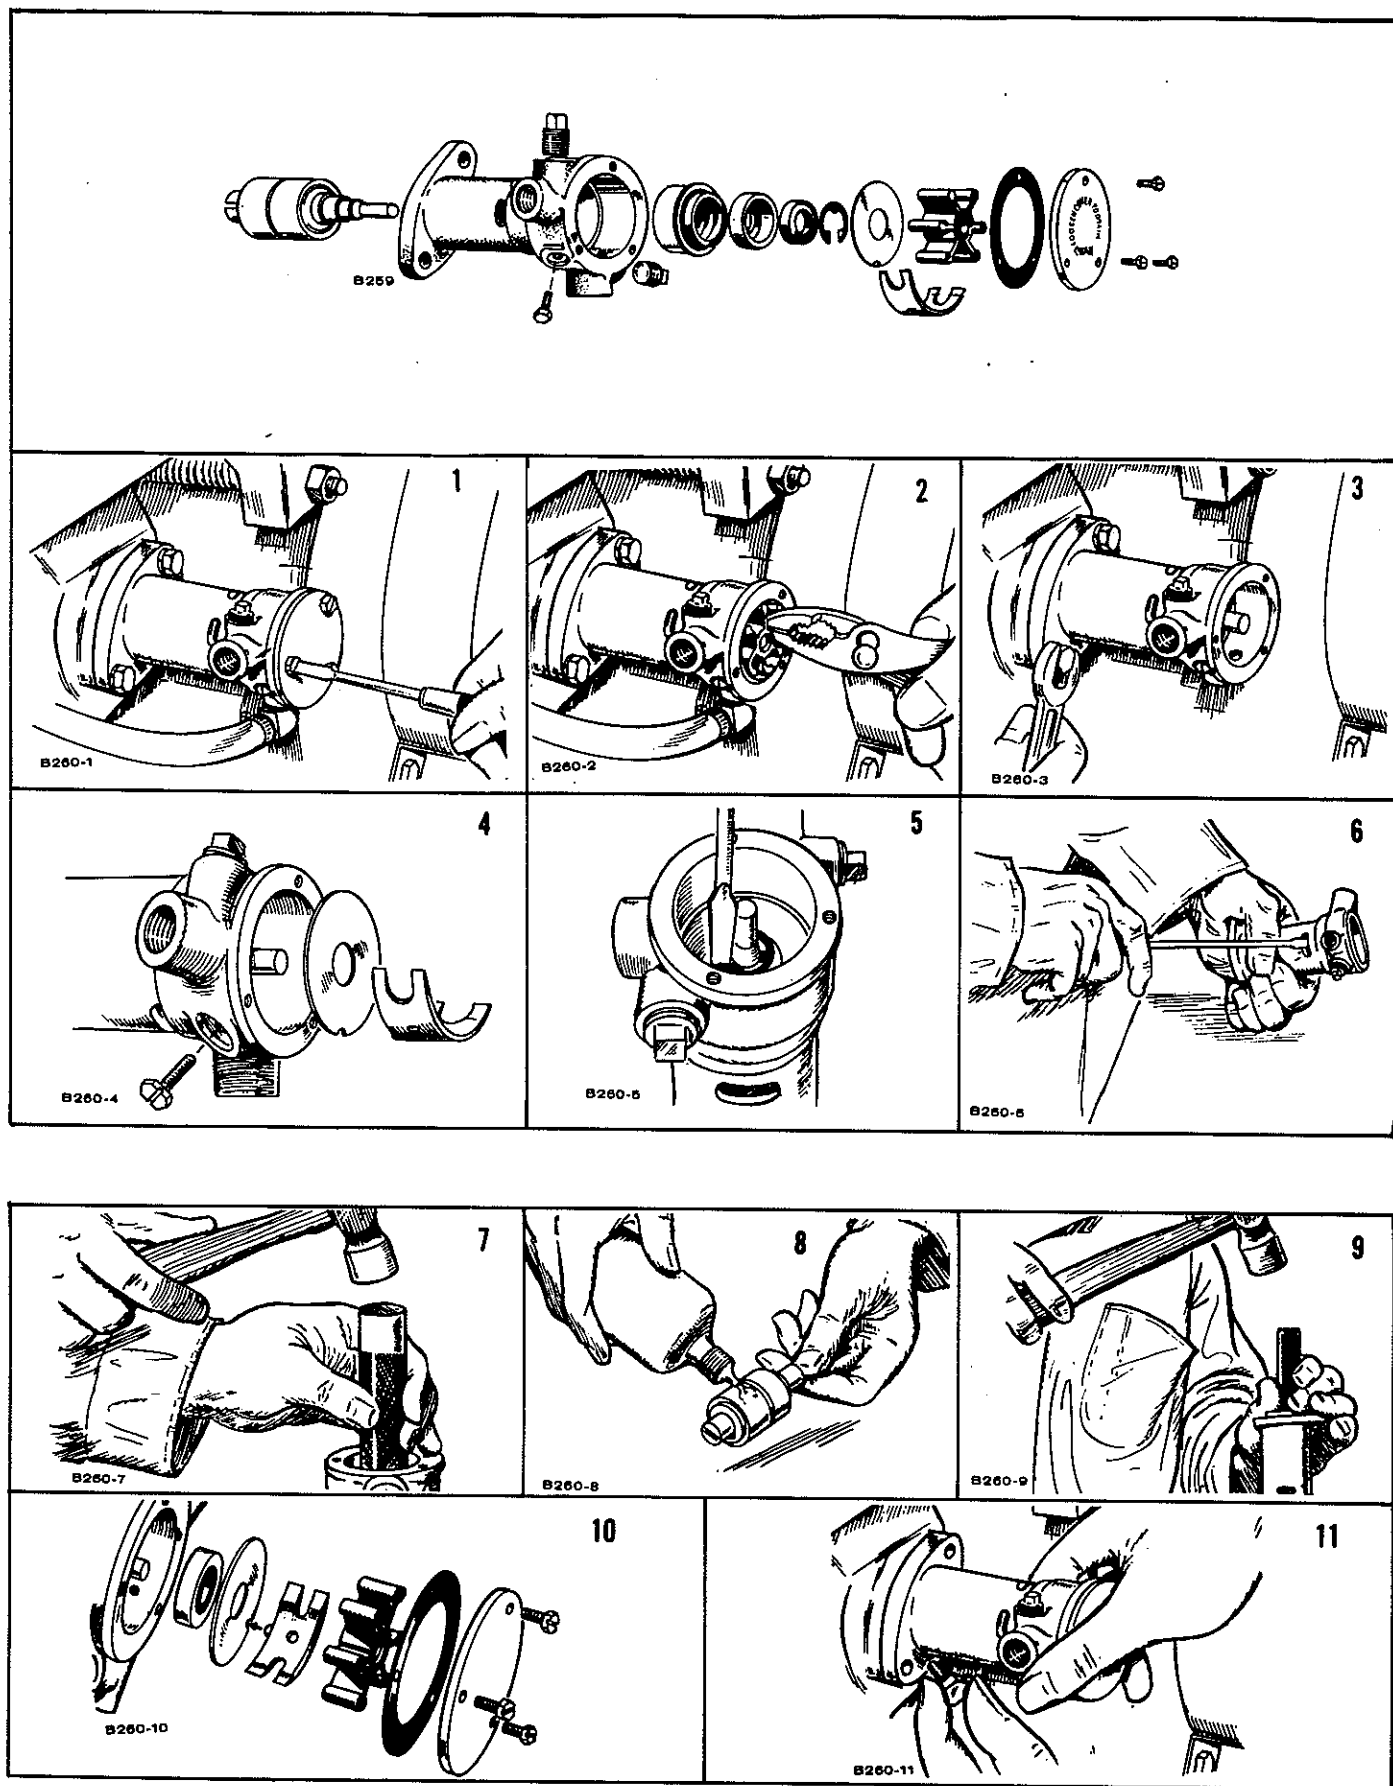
DISASSEMBLY—RAW WATER PUMP (131-0152)
